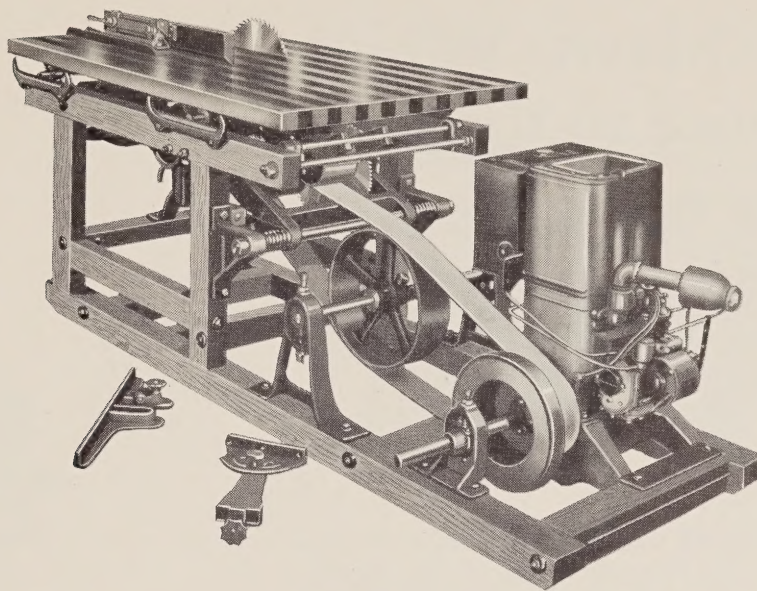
Beach Double Arbor Contractors' Equipment on Skids With 8-10 H.P. 2-Cylinder Engine.
